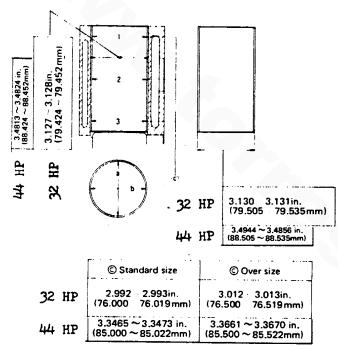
Standard Dimensions of Cylinder Liner and Liner Bore in Block
